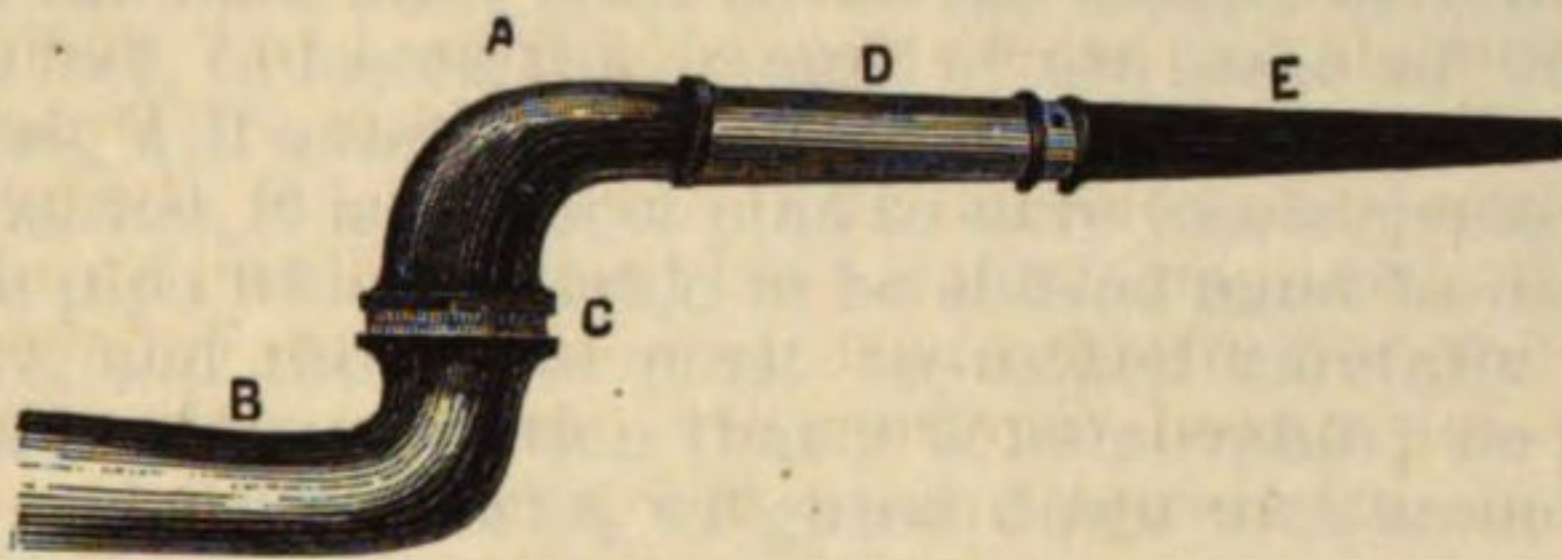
Goose-neck. A B, elbow; C, joint; D, piece of hose; E, discharge-pipe. (See p. 416.)
